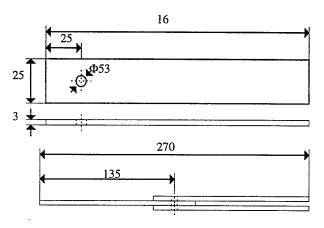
Double Lap Joint Specimen Geometry (All dimensions in mm).
